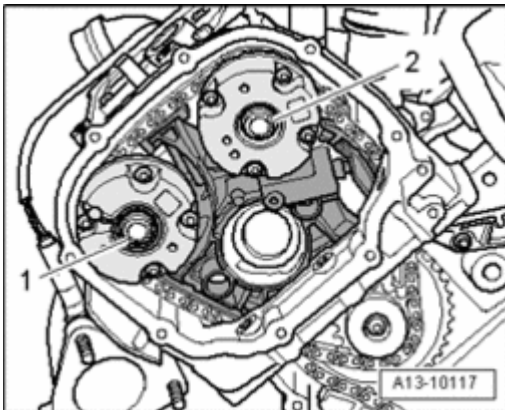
Removing/Installing Camshaft Adjuster Screws On Left Cylinder Head
